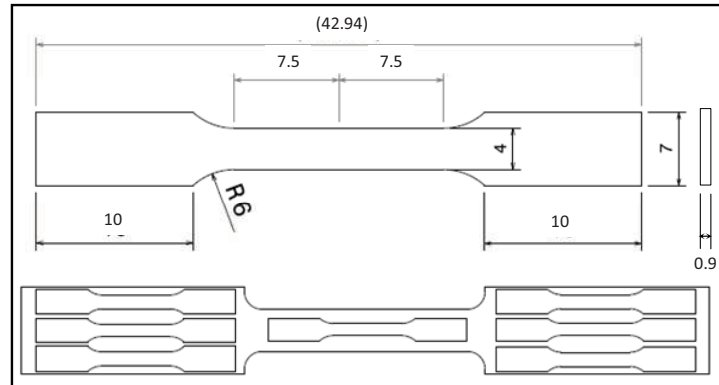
Microscale tensile specimen drawing and sampling plan (dimensions in mm)
